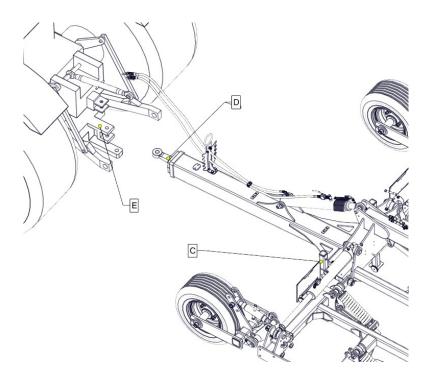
Connecting the drawn machine to the tractor drawbar (hitch)
